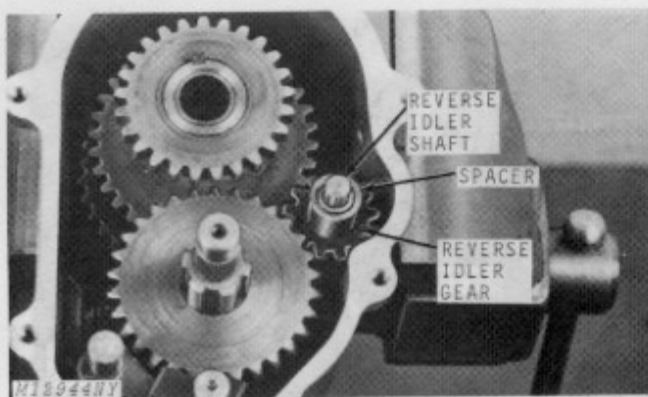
Installing Reverse Idler Gear, Shaft and Spacer
